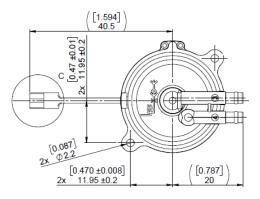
BL/XP/LT Series Mounting Geometry. Dimensions in mm [inches]
